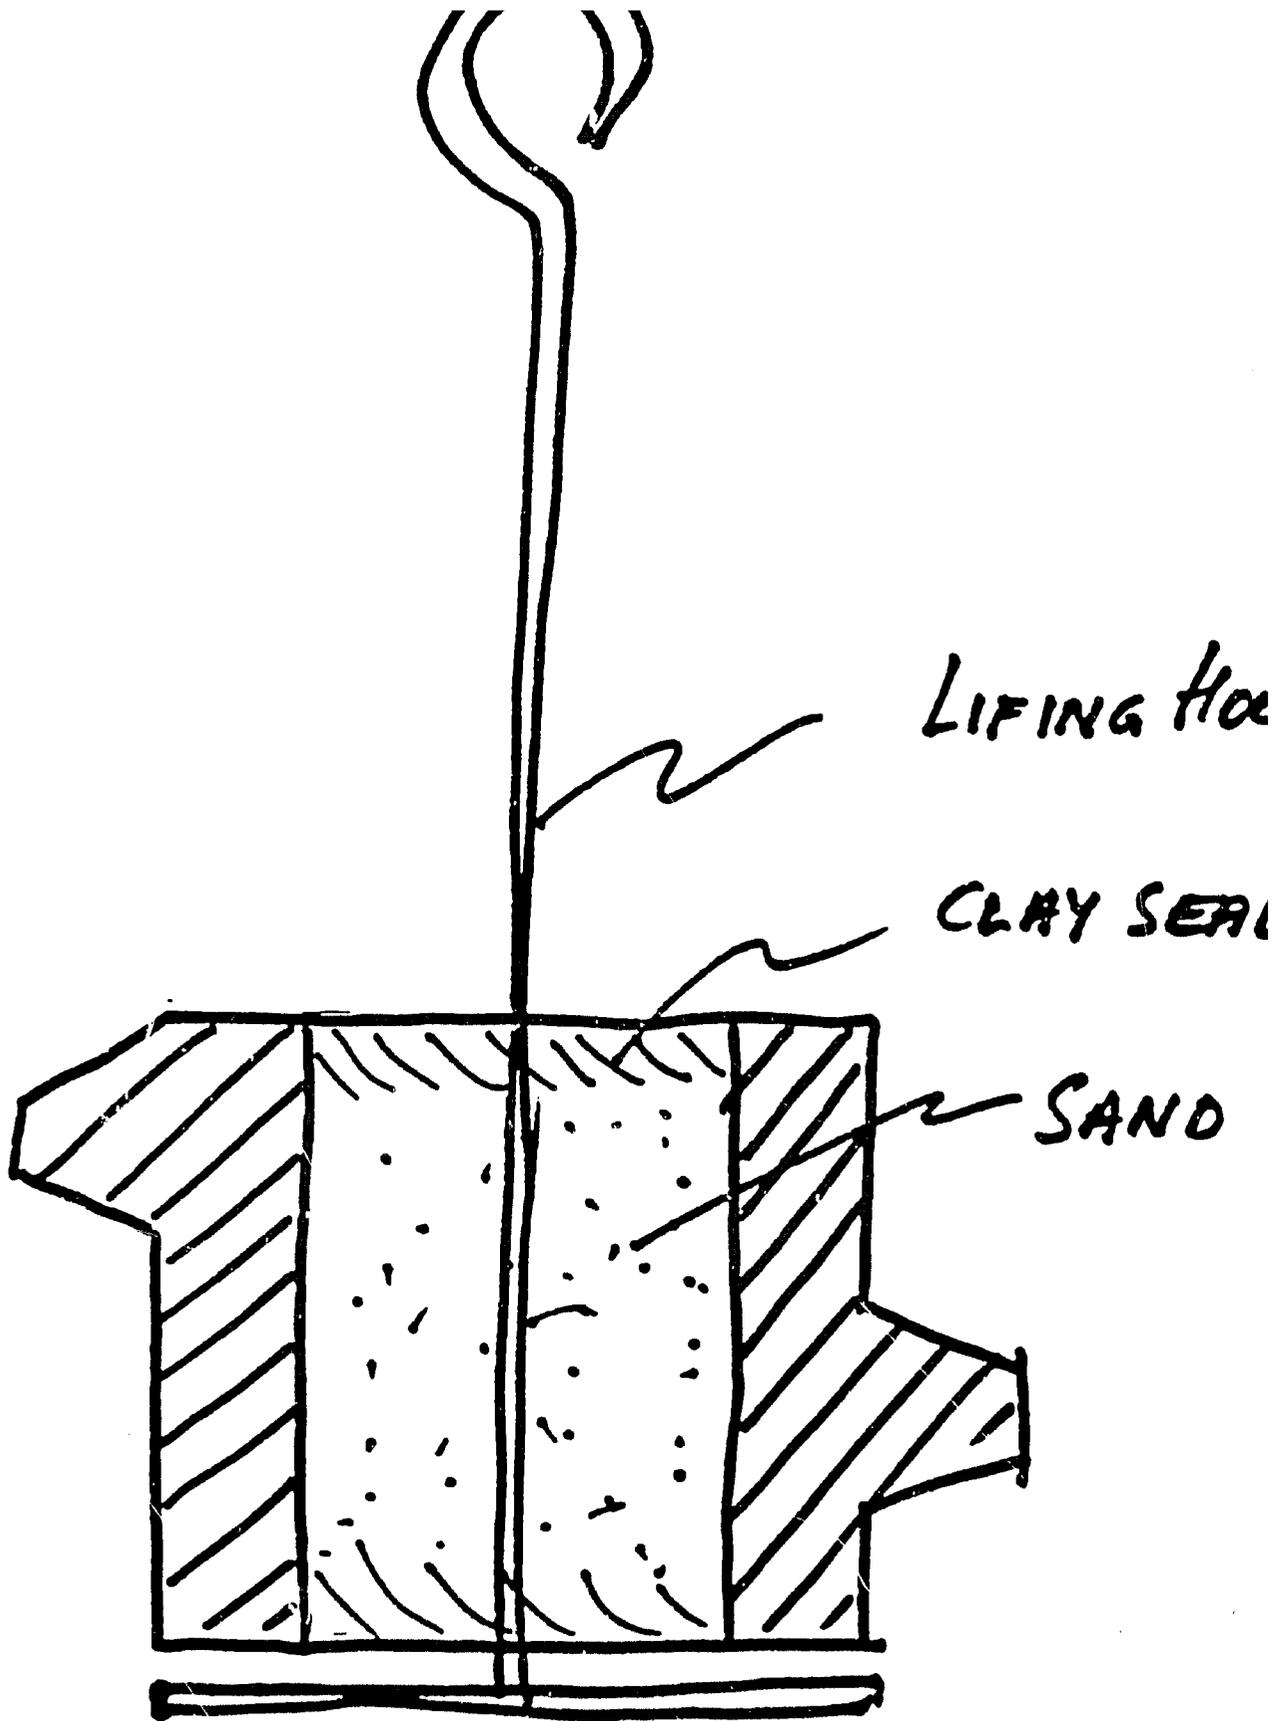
CROSS SECTION OF PRESSING WORM
